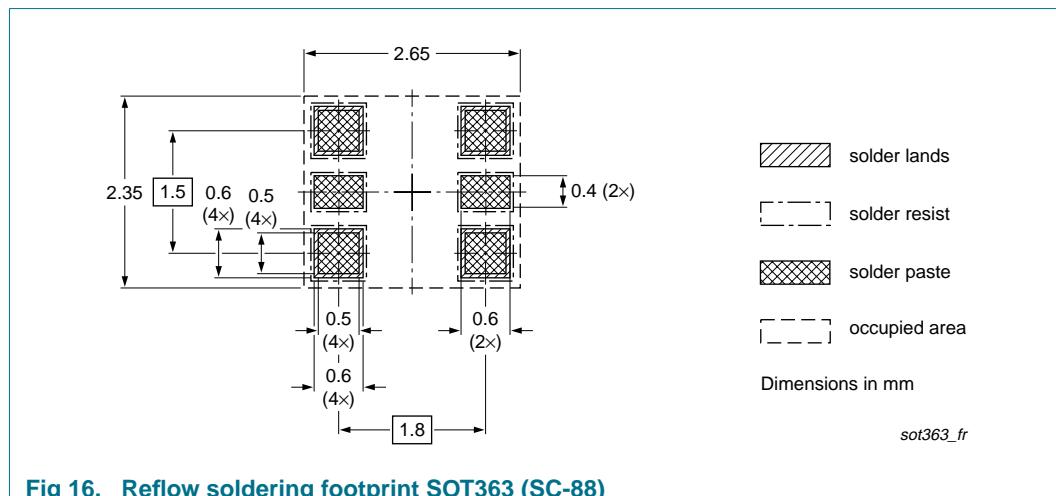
Reflow soldering footprint SOT363 (SC-88)
